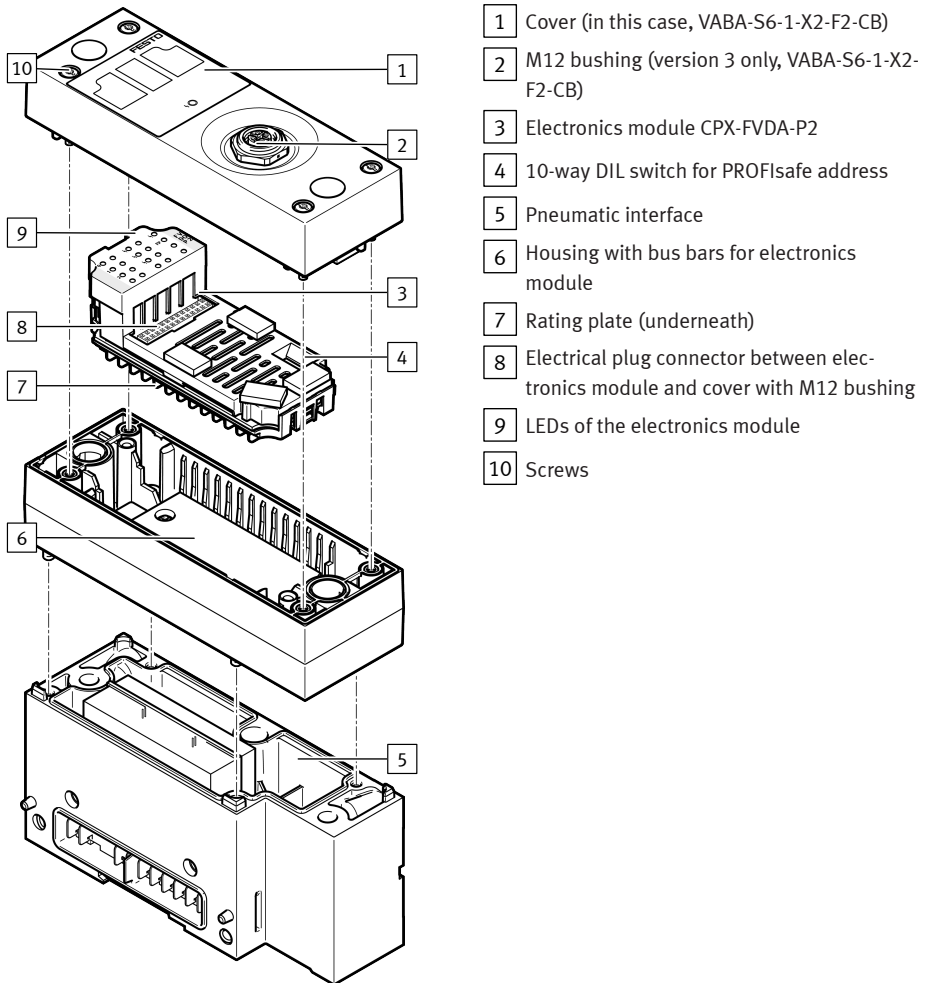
Output module CPX-FVDA-P2 in a pneumatic interface VABA-S6-1-X...-F1/F2-CB of the valve terminal VTSA-F-CB
